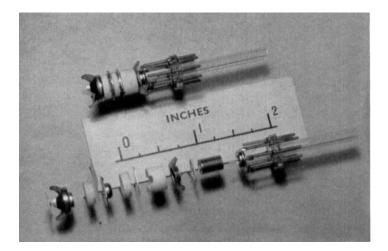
Electron gun parts and completed gun for  $\frac{1}{2}$ -in. vidicon.
